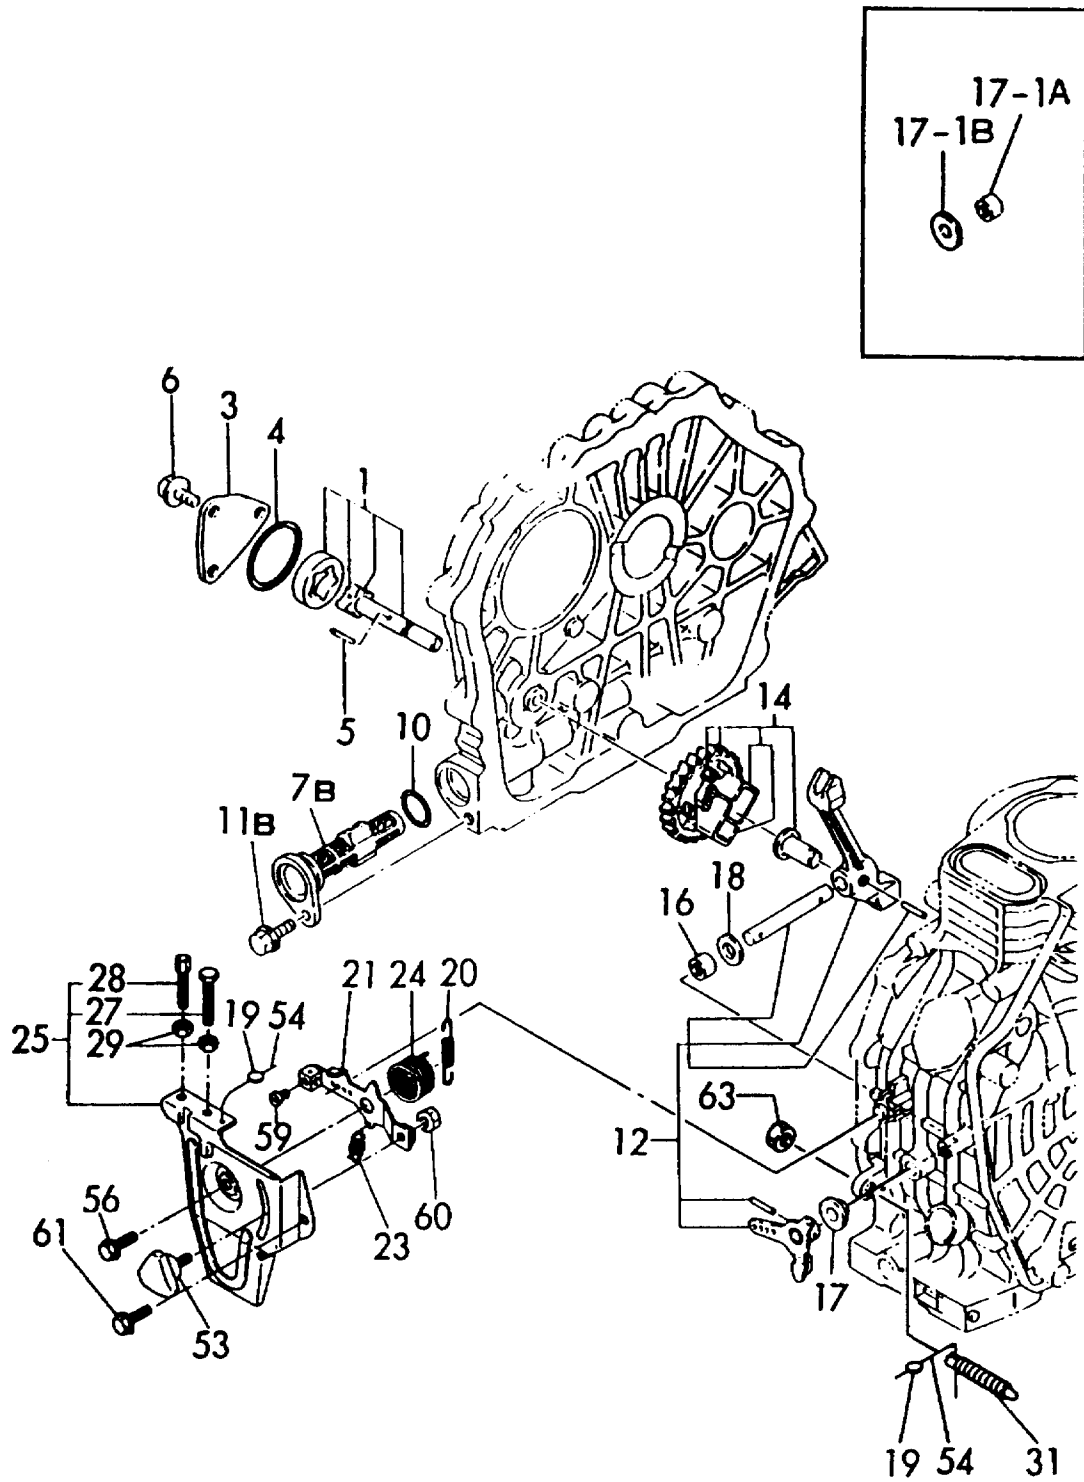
LUBRICATING OIL PUMP AND GOVERNOR
